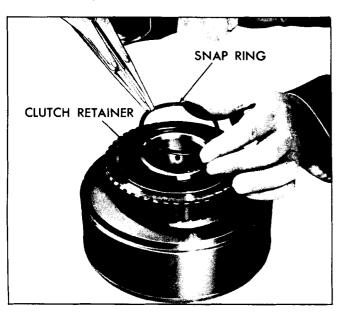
E-124 Removing or Installing Clutch Retainer Snap Ring
